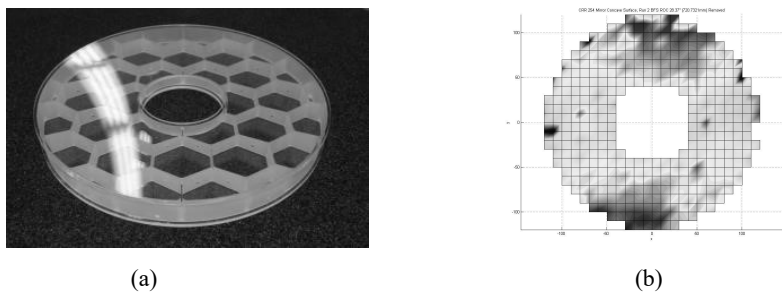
a) CRR ULE mirror and b) surface figure of a CRR ULE mirror as measured with a CMM
